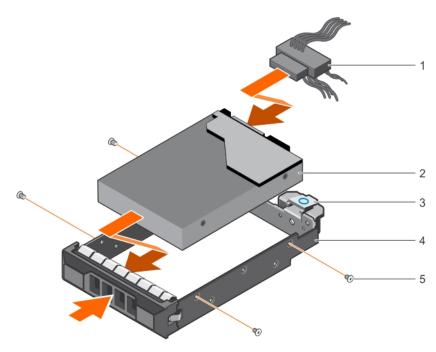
Installing a 3.5-inch cabled hard drive carrier
